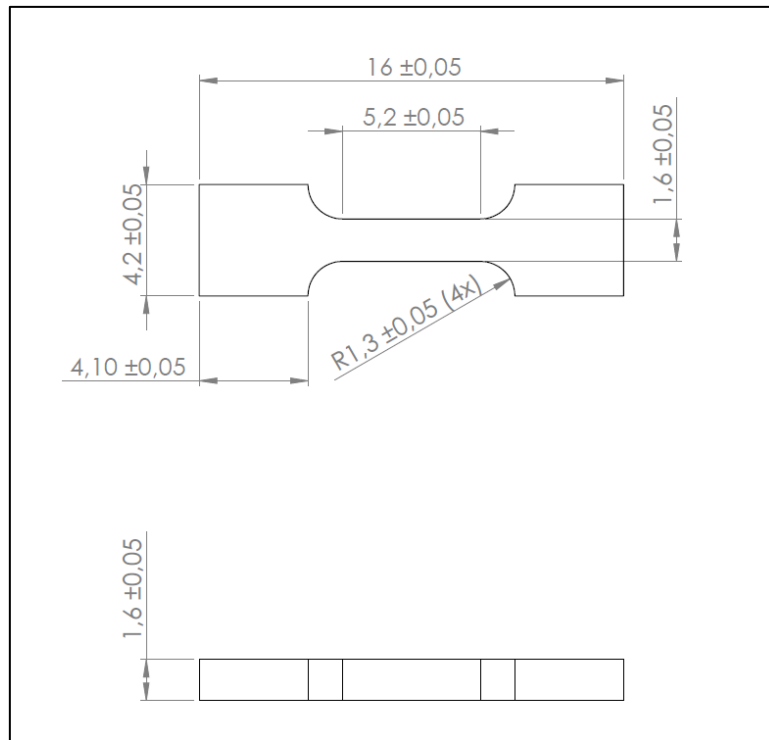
Technical drawing of the tensile specimen used for the tensile tests.
